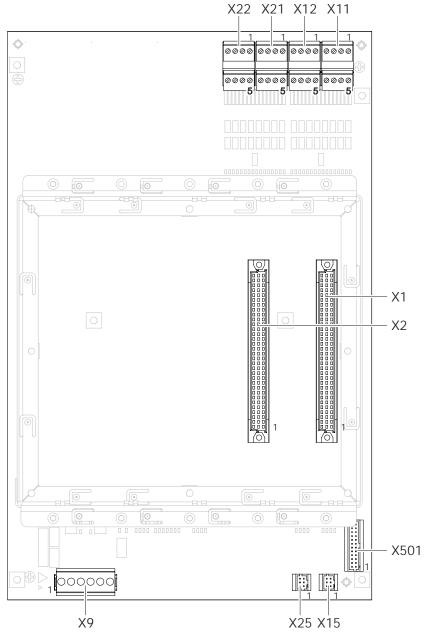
PCB view of card cage (2 slots) FCA2007-A1
